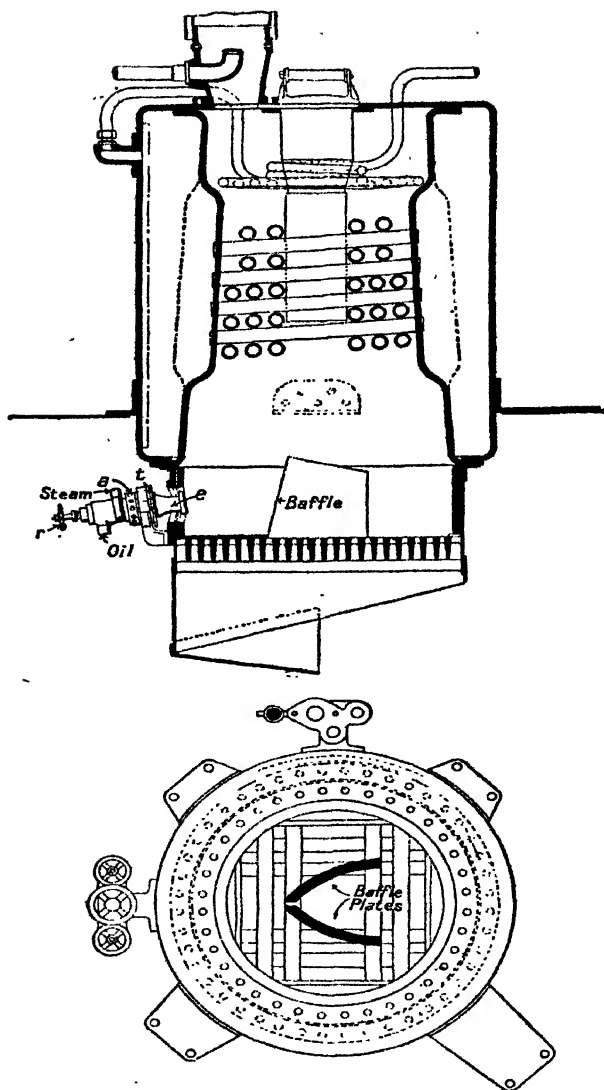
Motor lorry boiler arranged for burning oil fuel,
